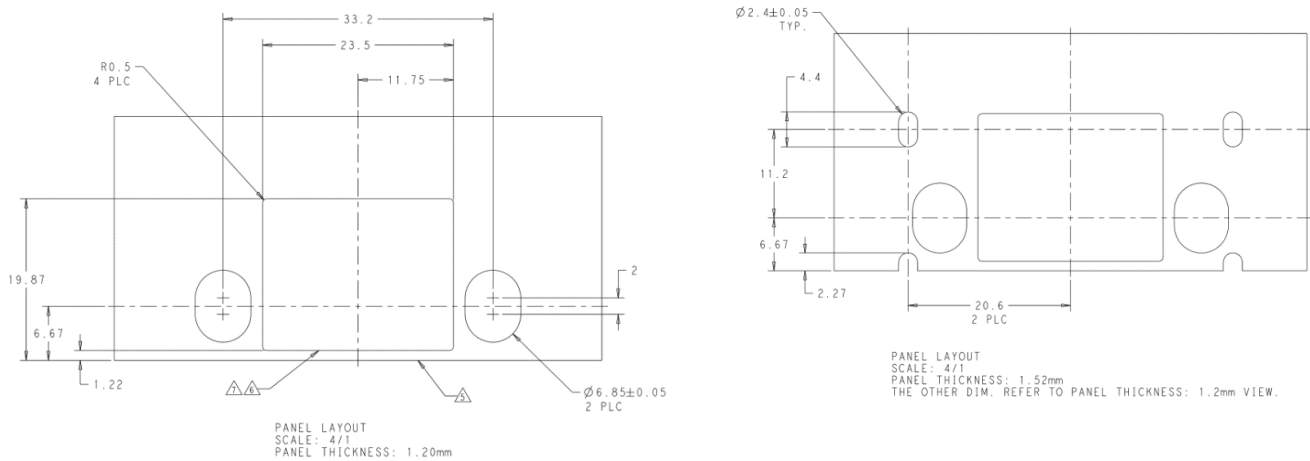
The recommended panel board layout view for Pluggable Bus Bar 25A cable/PCB-mount conn.
